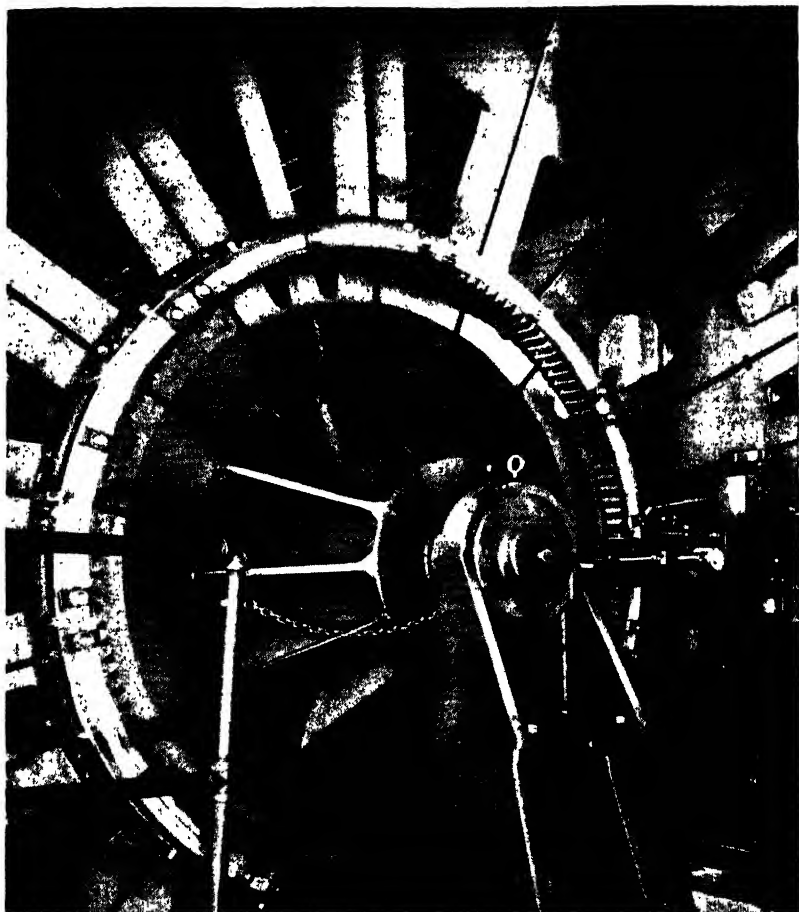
Cutting Large Internal Gear on Planer of Templet Type
